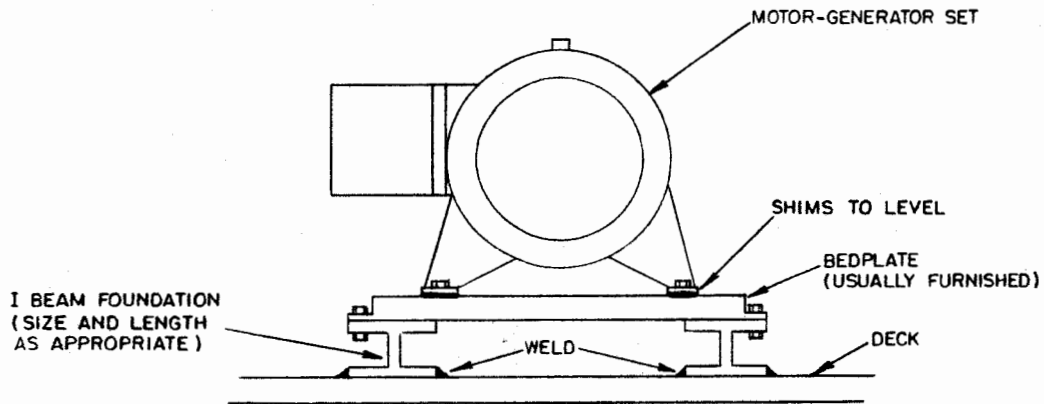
I Beam Foundation, Rigid Deck Mount
